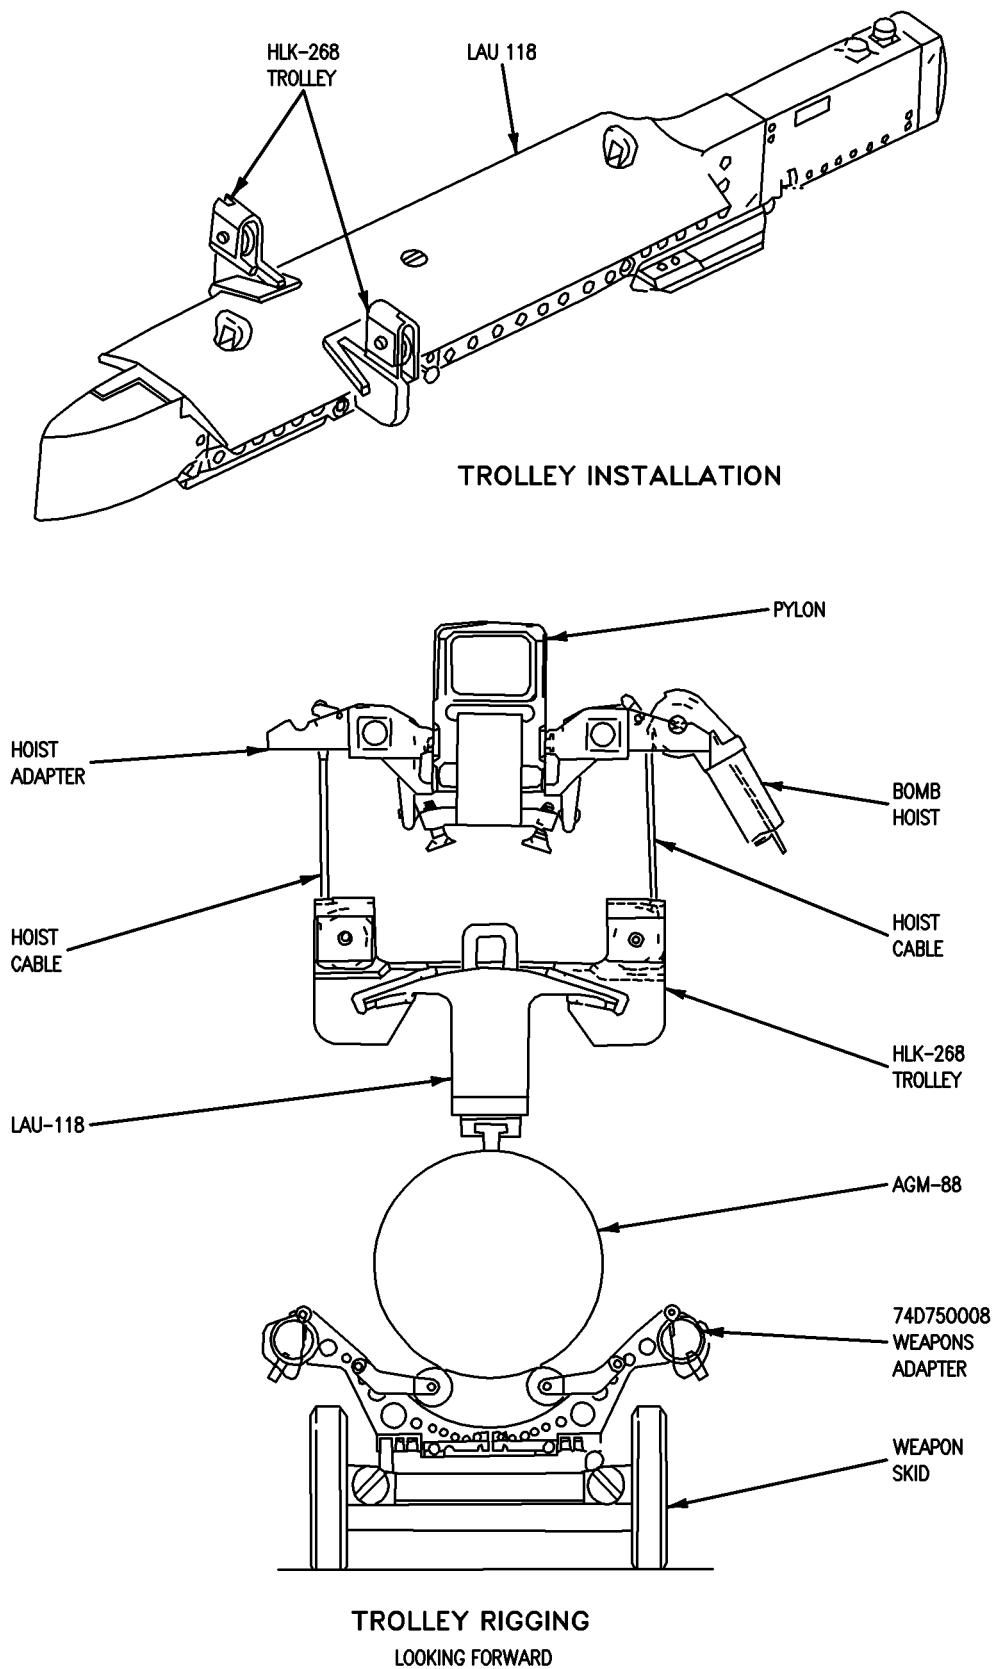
LAU-118 HLK-268 Trolley Installation and Rigging
